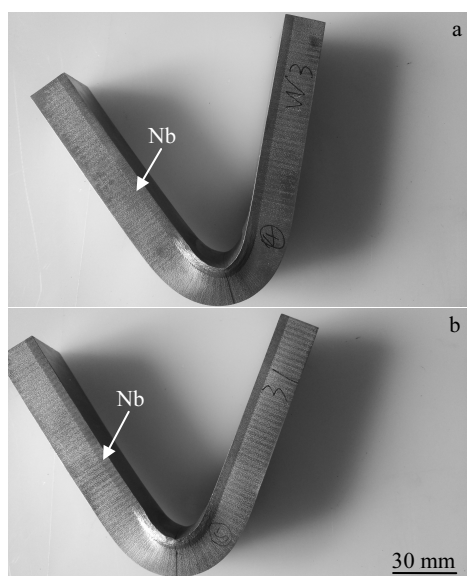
Bending test of as-received explosive welded plate (a) and plate after annealing (b)
